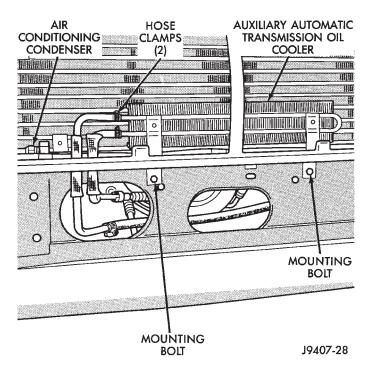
Auxiliary Air-To-Oil Cooler—XJ Models—4.0L Engine
